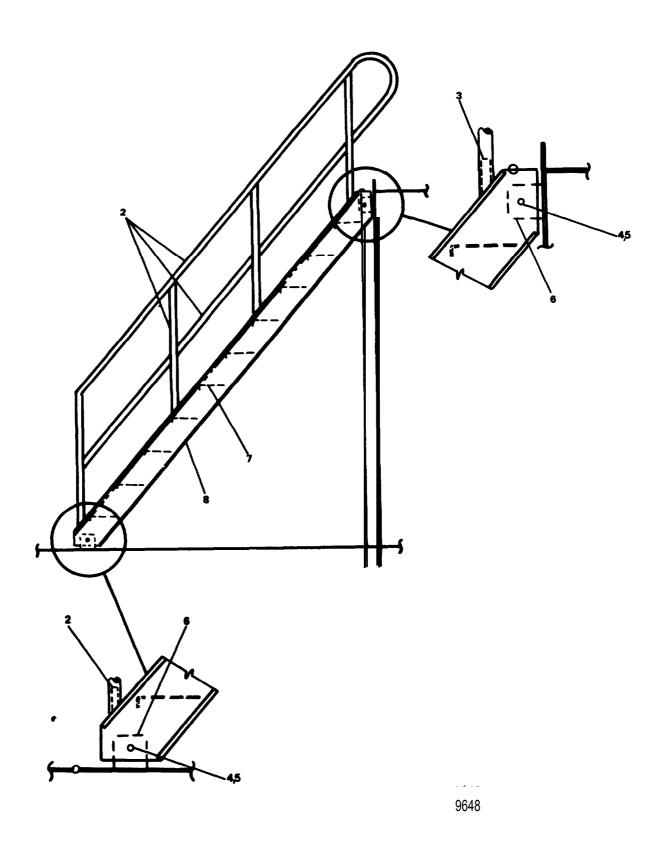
Main Deck Ladders and Handrails(Sheet 2 of 3).
